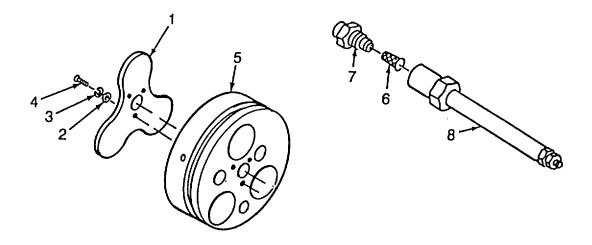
Burner Assembly (Sheet 1 of 5)
